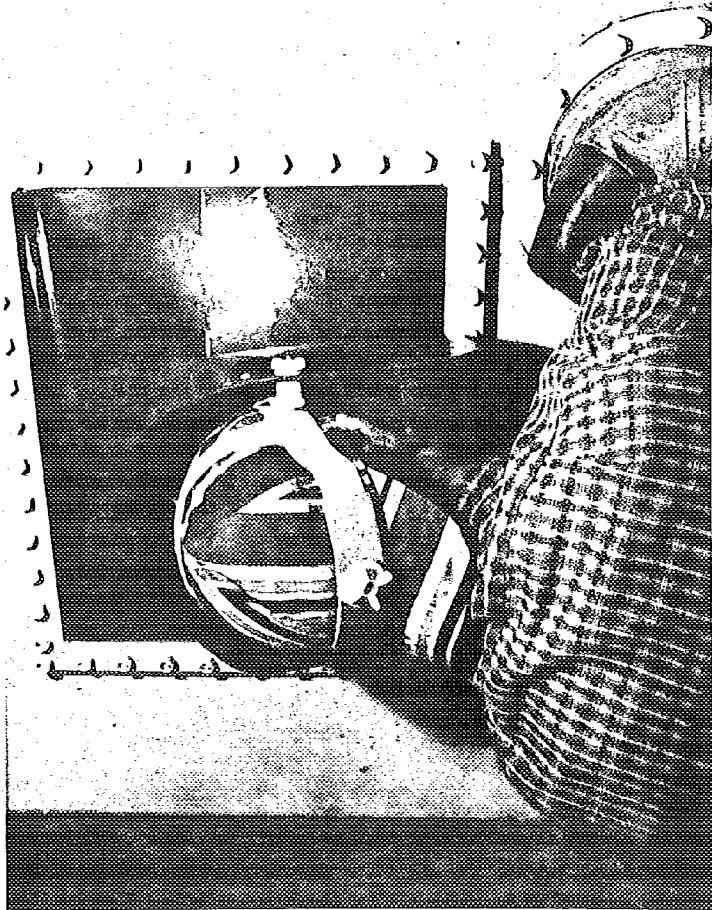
Trainee's view of weld being deposited in vertical position
